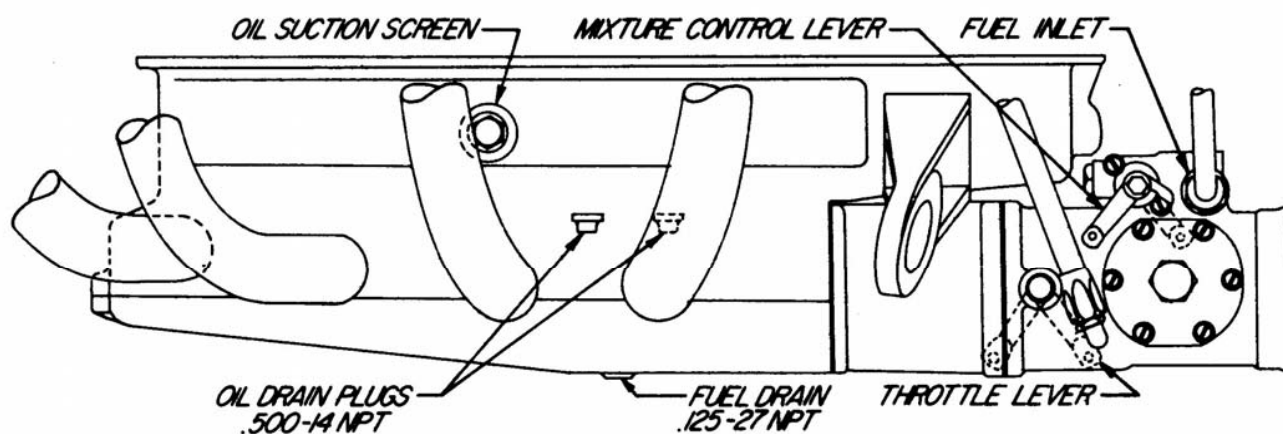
Lower Right Side View – Typical IO-720 – Rear Inlet
